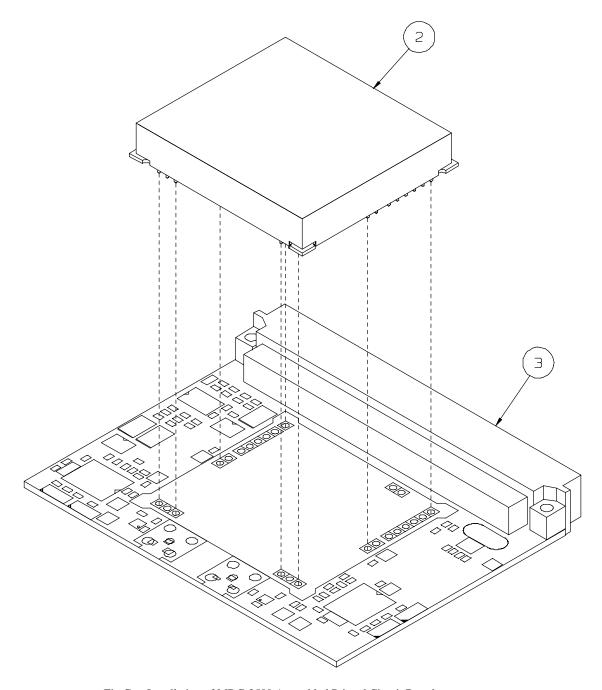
Fig C-g Installation of MDC-2500 Assembled Printed Circuit Board
